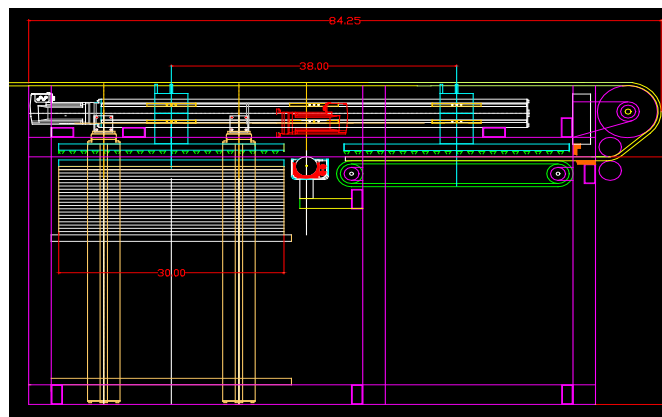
CAD drawing of the proposed Machine basic design concept
